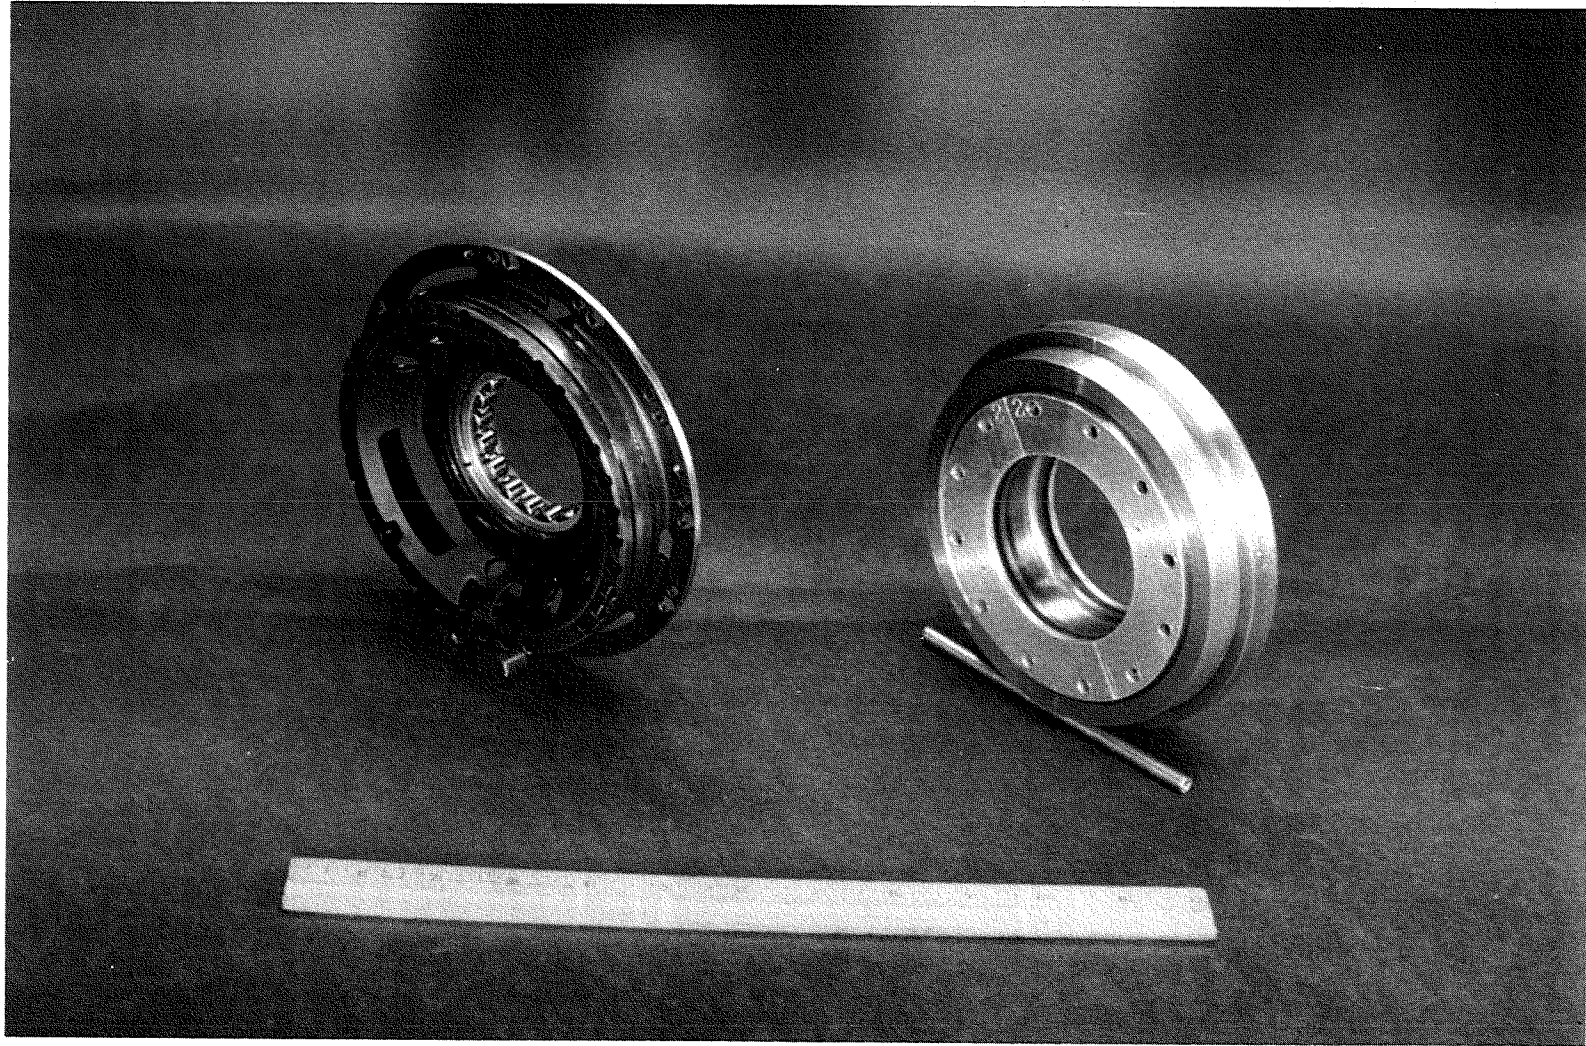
The Production T-55 Roller Bearing Support and the Replacement Elastomer Damper
